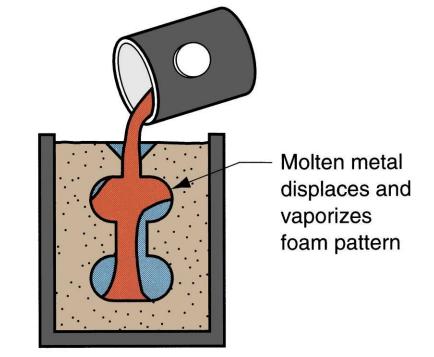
Expanded polystyrene casting process: (2) foam pattern is placed in mold box, and sand is compacted around the pattern; Figure 11.7 Expanded polystyrene casting process: (3) molten metal is poured into the portion of the pattern that forms the pouring cup and sprue. As the metal enters the mold, the polystyrene foam is vaporized ahead of the advancing liquid, thus the resulting mold cavity is filled.
